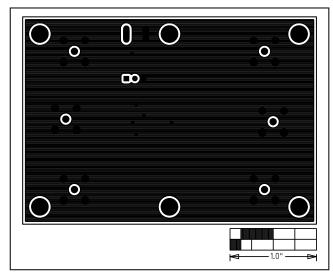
MAX9653 EV Kit PCB Layout—Solder Side
